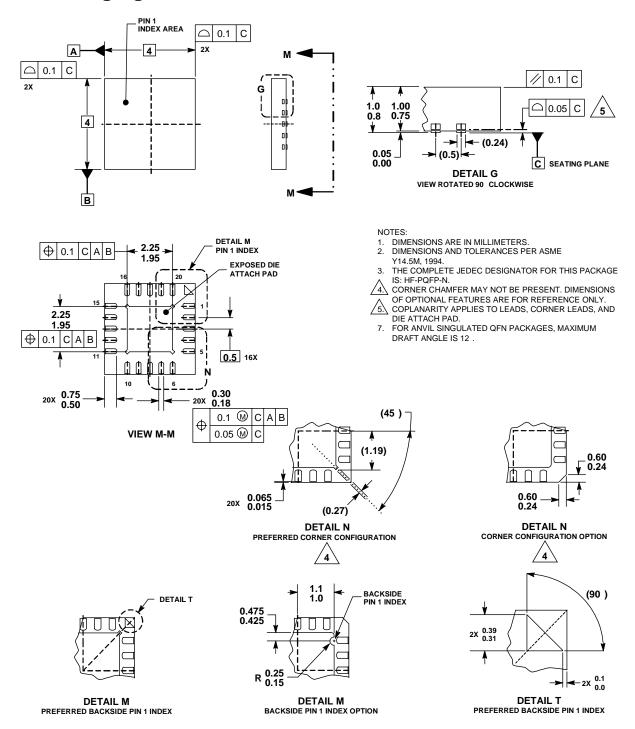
Outline Dimensions for QFN-20 (Case 1308-02, Issue C)
